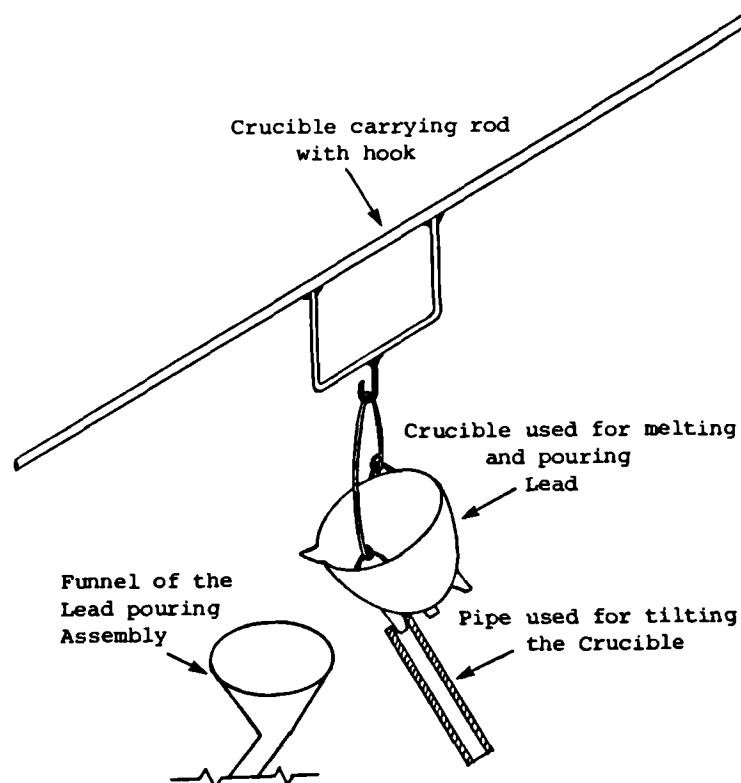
Crucible and carrying set-up used for pouring molten lead into the funnel of the lead pouring assembly.
